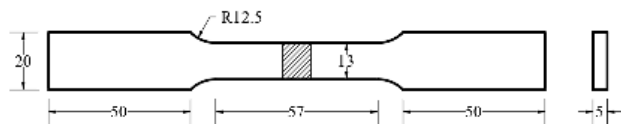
Dimensions of tensile sample (ASTM E8M-04).
